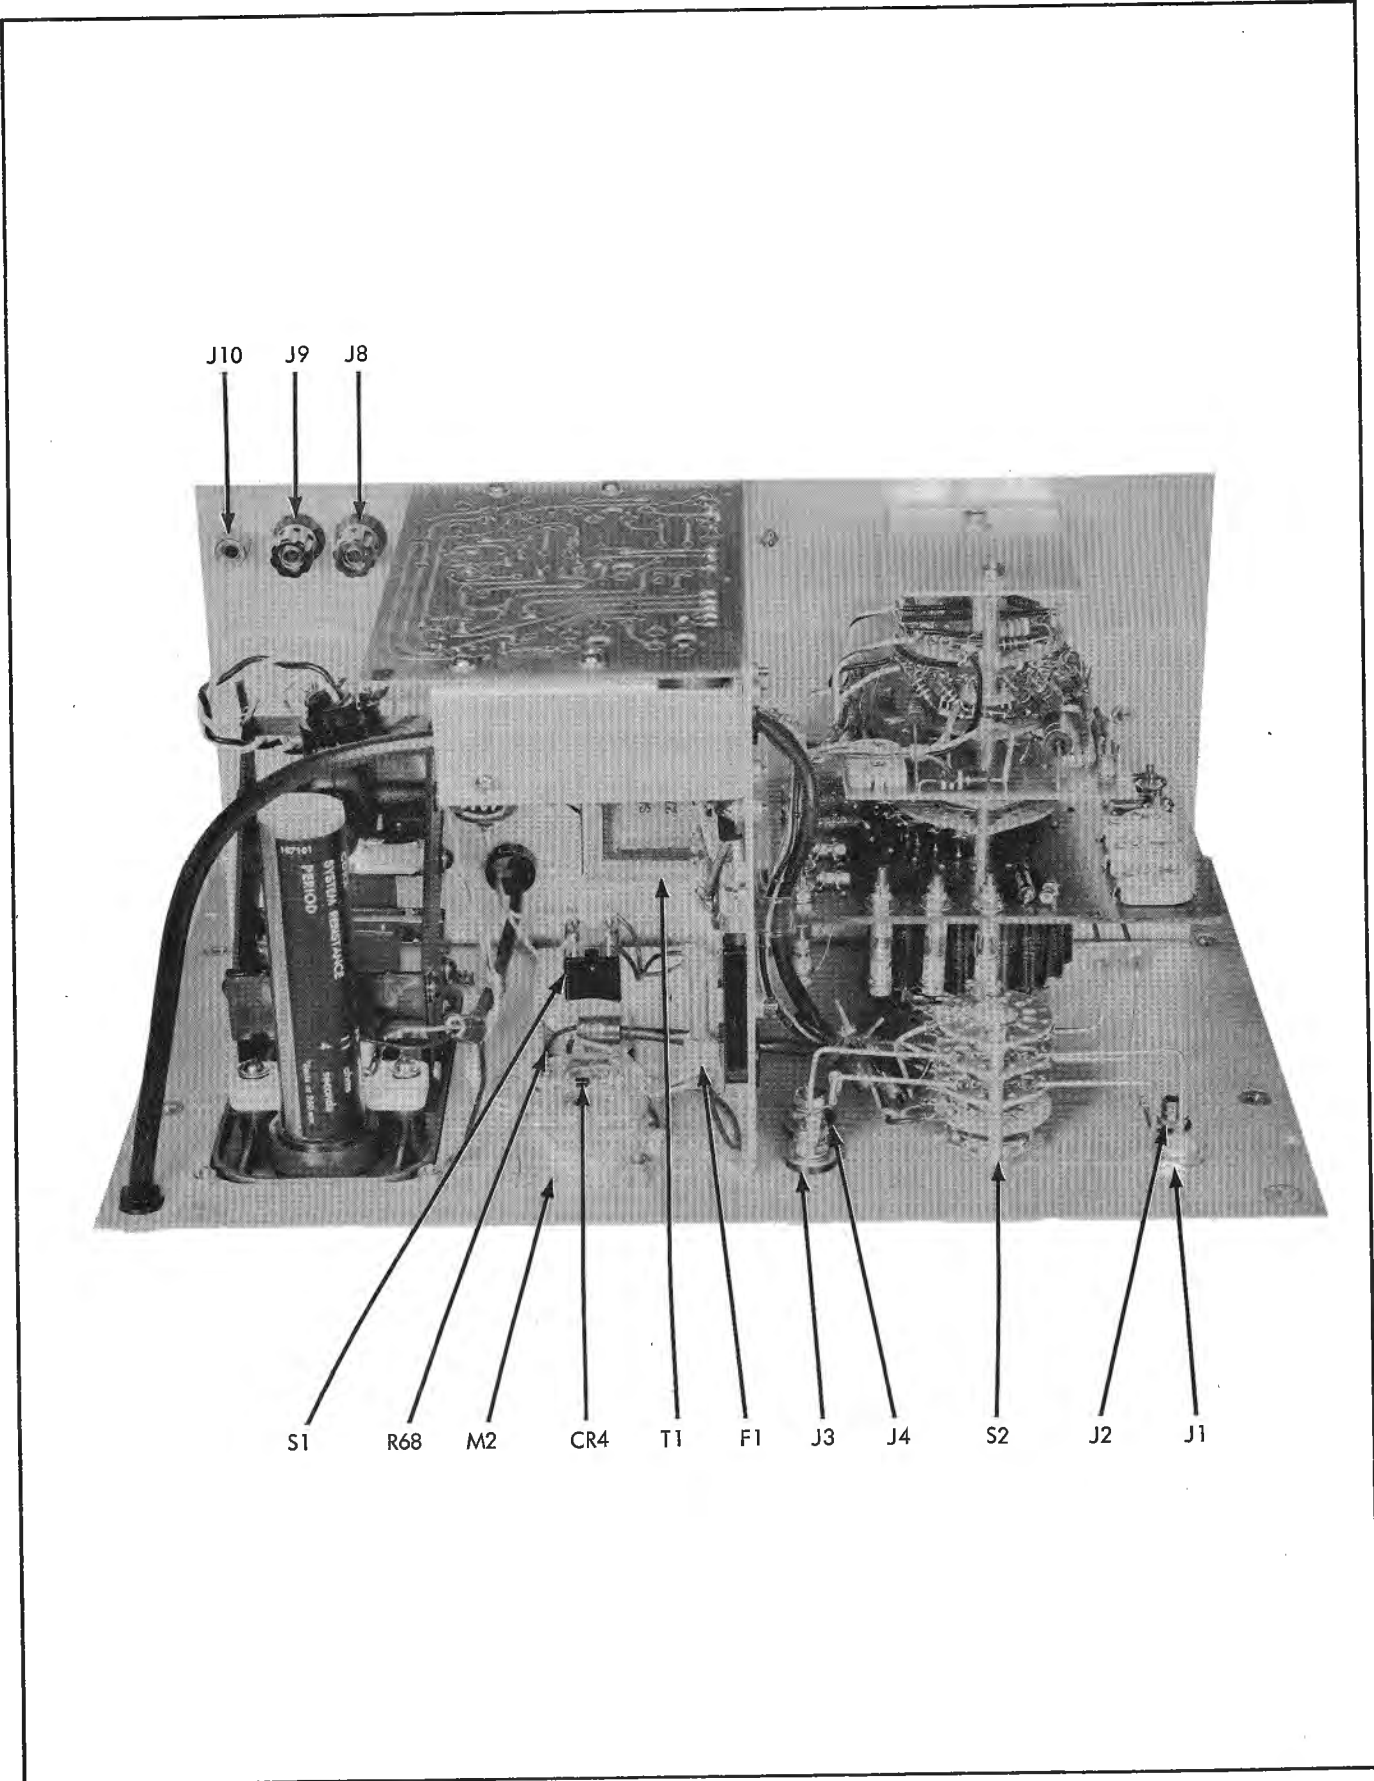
CHASSIS ASSEMBLY (sheet 2 of 2)
